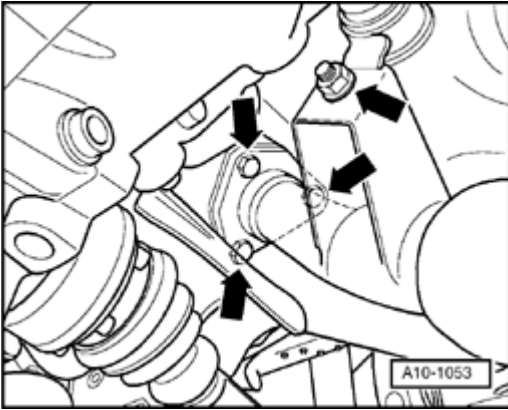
Removing Bolts Securing Catalytic Converter To Front Exhaust Pipe
